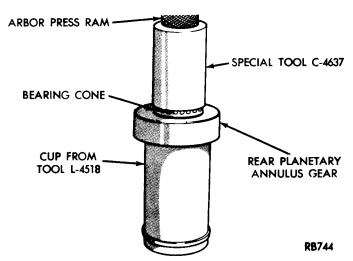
Install Rear Planetary Annulus Gear Bearing Cone
